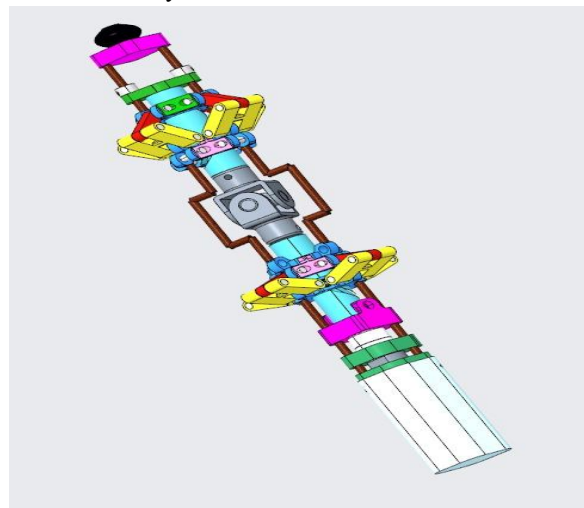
Worm Robot CAD Model Assembly and Isometric View
